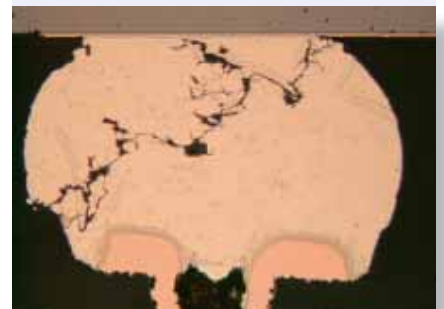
Microvia: lift-off from PCB and solder crack after thermal cycling (1500x)
